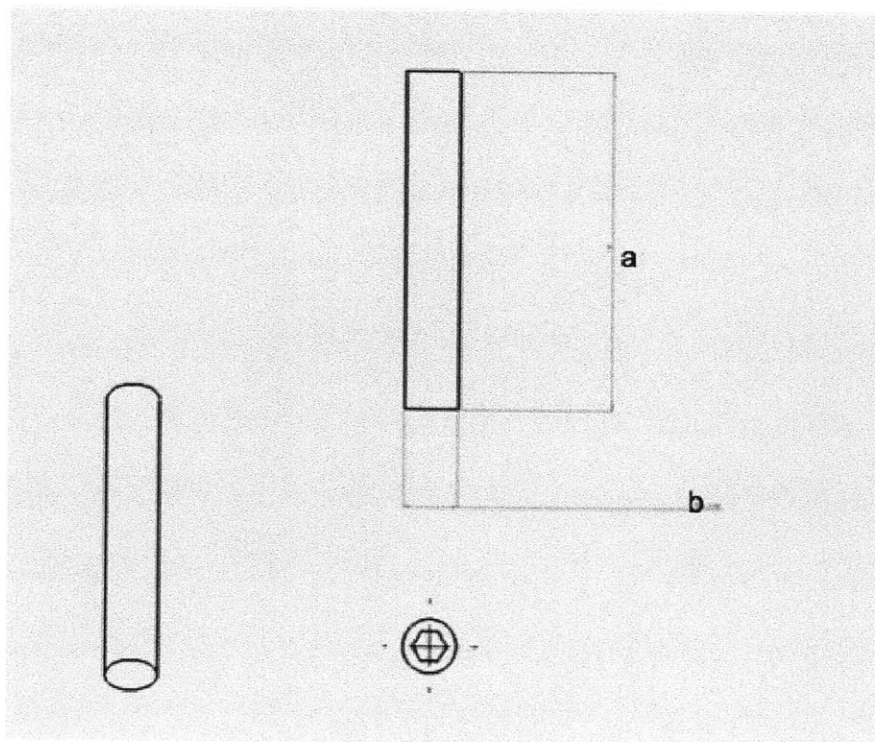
Bolt. Dimensions: (a) length. (b) diameter.
